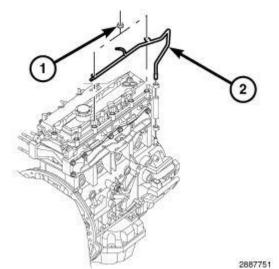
Retaining Nuts & Vacuum Line Courtesy of CHRYSLER LLC
